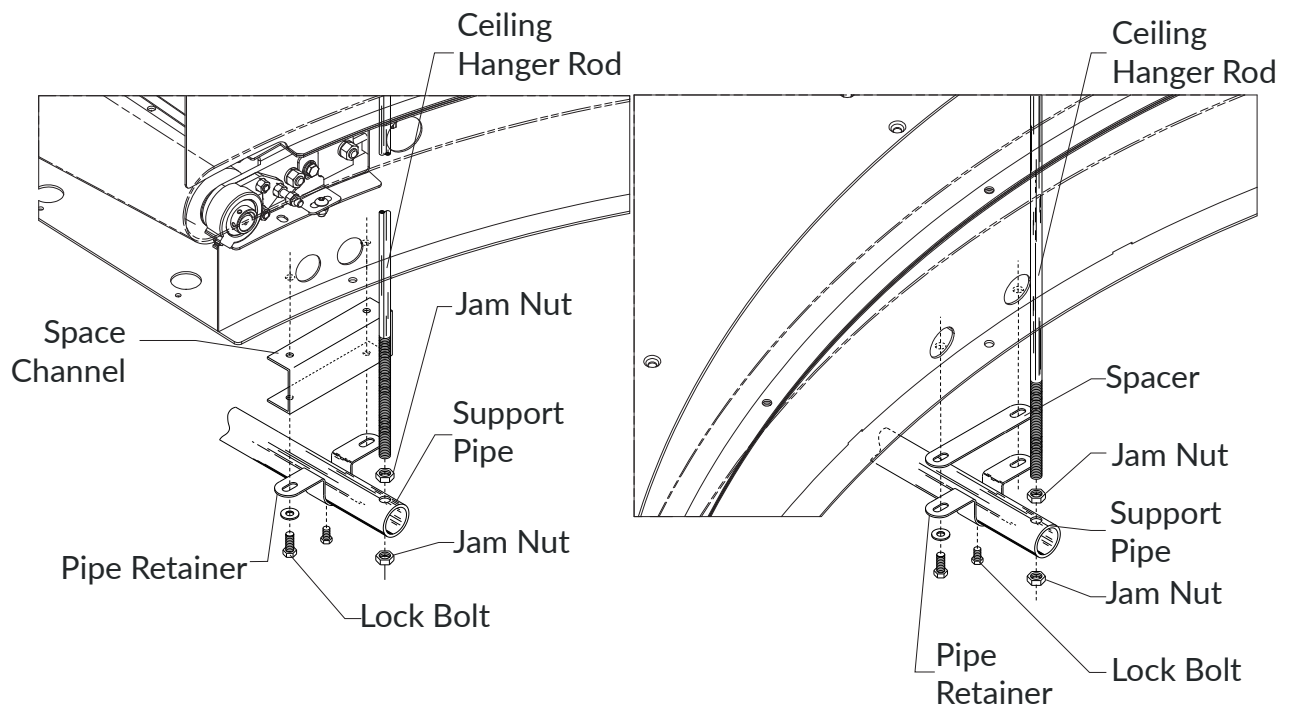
and 4.2 show how a ceiling hanger mounts to a conveyor section. Ceiling hangers should be mounted at section joints. Ceiling hanger rods need to be at a minimum of 3 inches from the inside channel.
